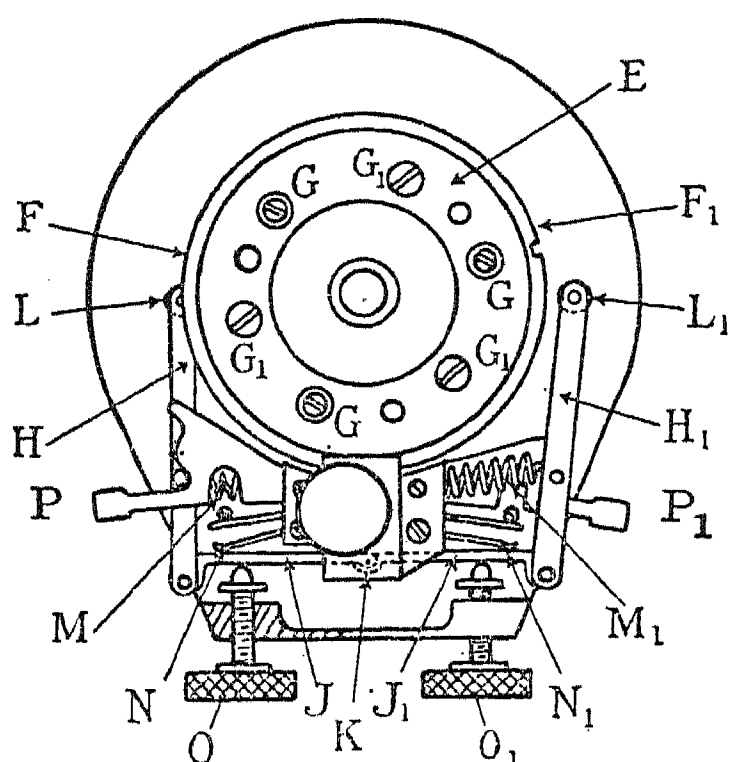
(b).—Receiver condenser dial (covers, etc., removed).
